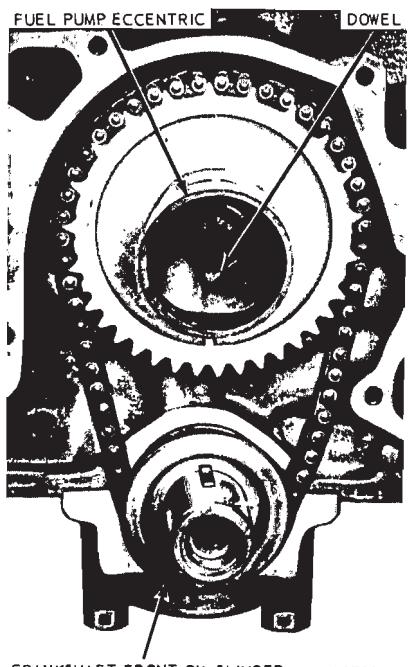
Fuel Pump Eccentric and Front Oil Slinger Installed
